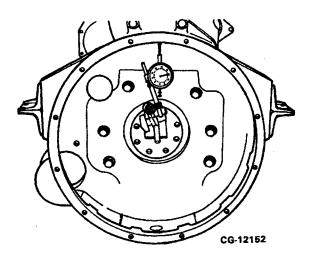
Check the Concentricity of the Flywheel Housing Bore in Relation to the Axis of the Crankshaft
